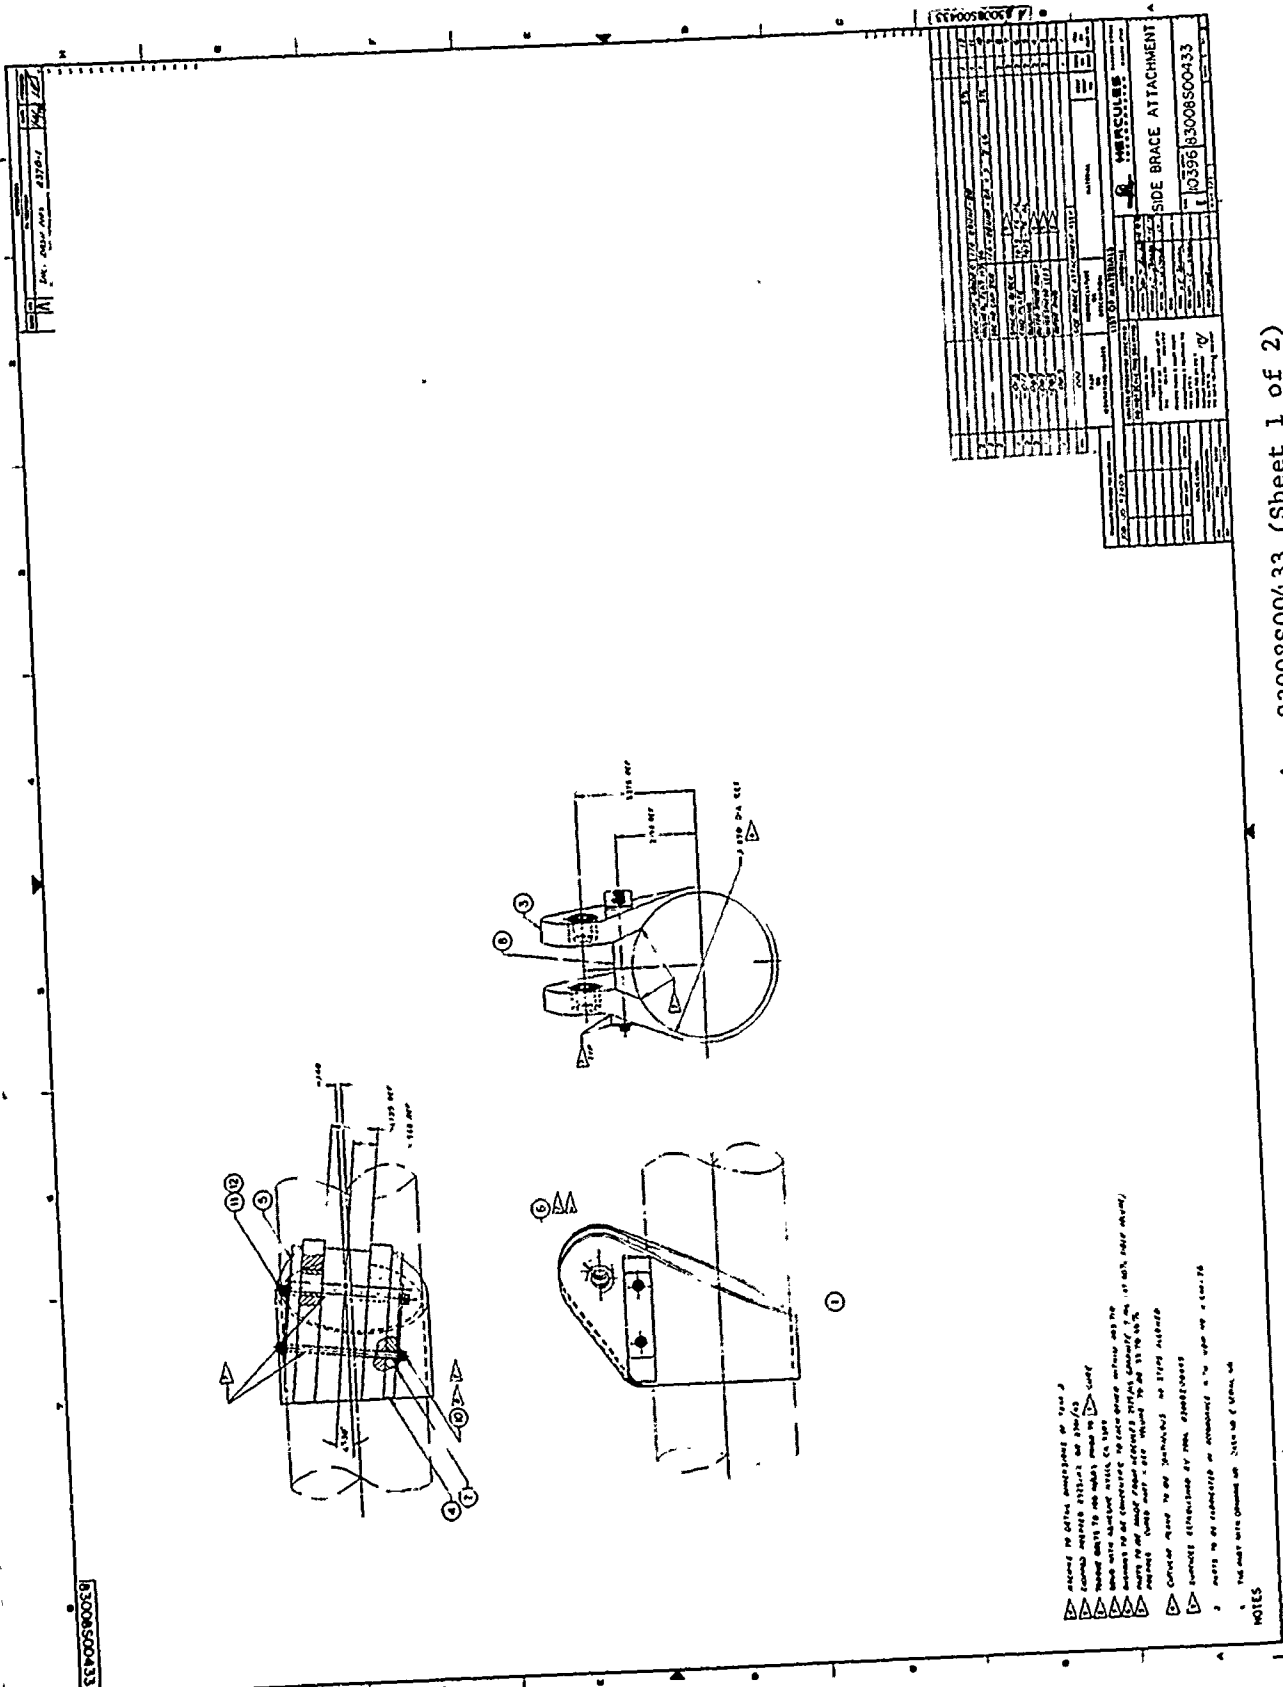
Side Brace Attachment, Drawing 83008S00433 (Sheet 1 of 2)
